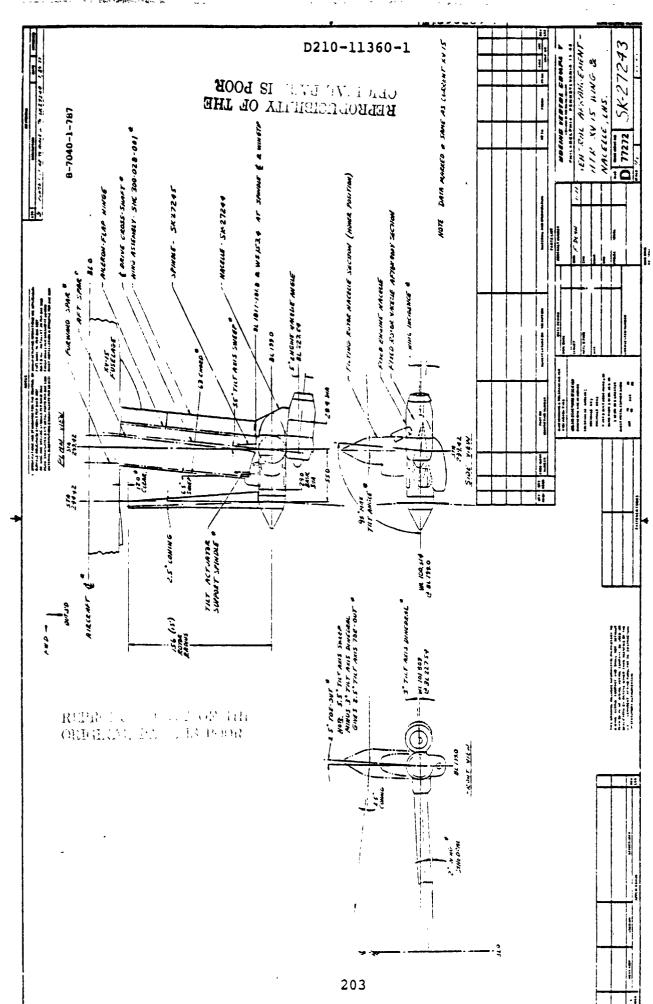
GENERAL ARRANGEMENT HTR XV-15 WING
